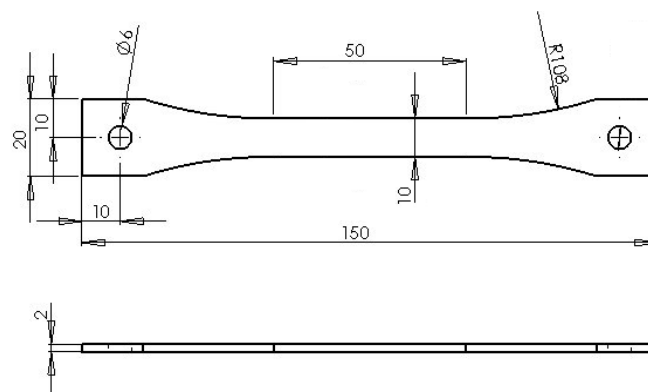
Tensile test specimen geometry bulk specimen (dimensions in mm).
